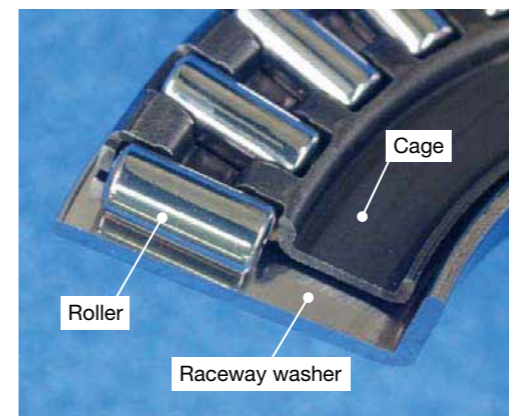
Cutaway view of low-torque thrust needle roller bearing
